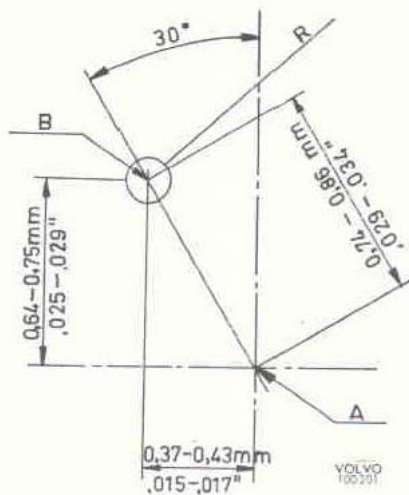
Eccentricity for front wheel rear linings, bonded type.
